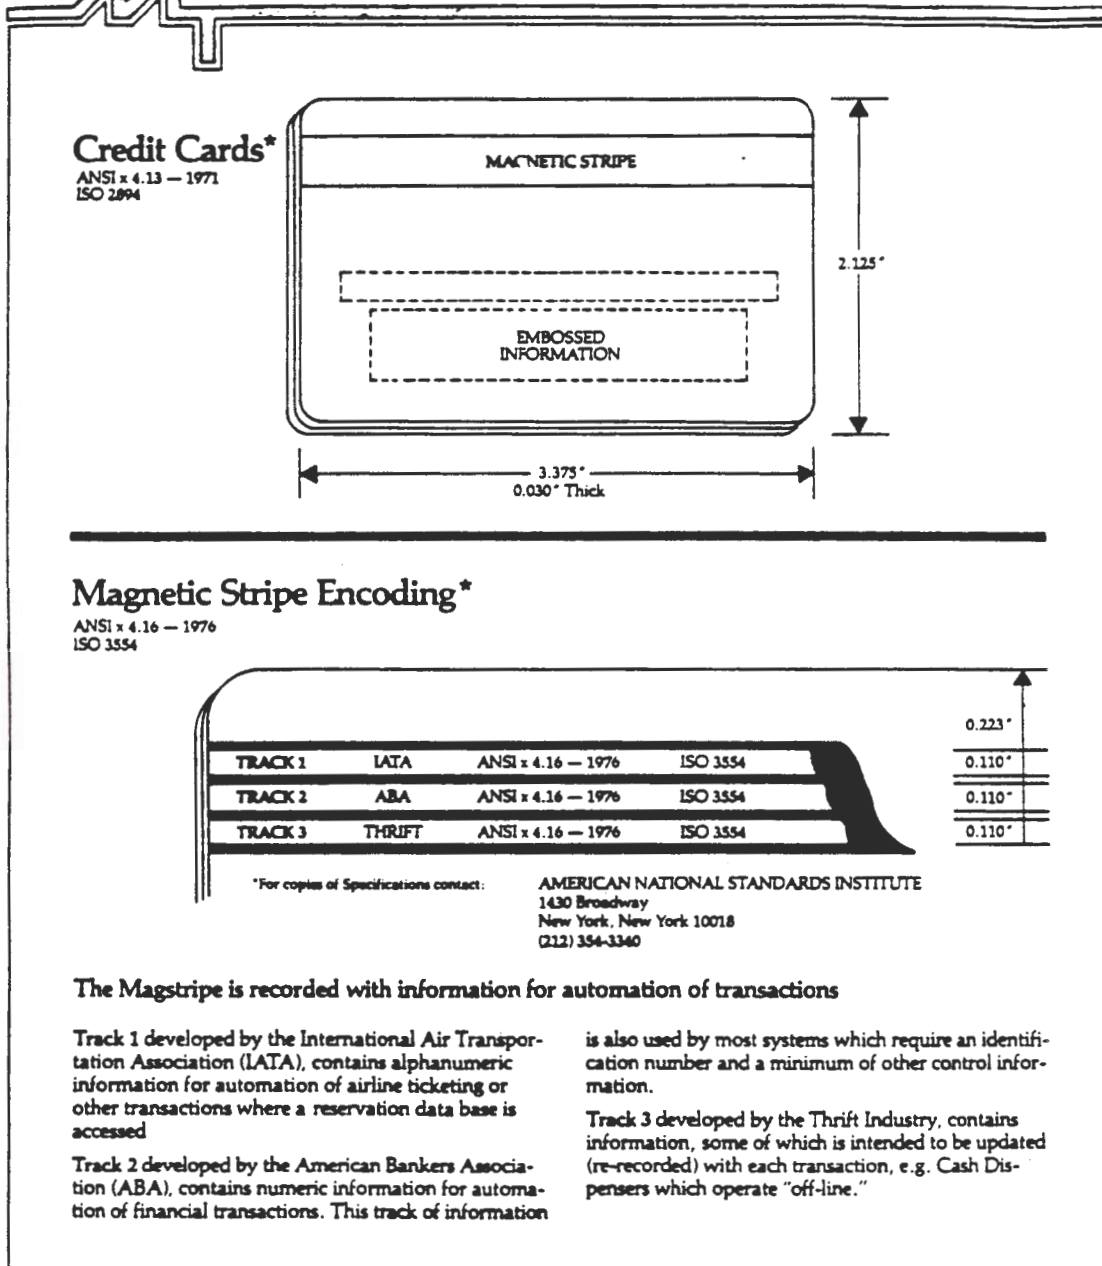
MAGNETIC STRIP CARD STANDARDS
